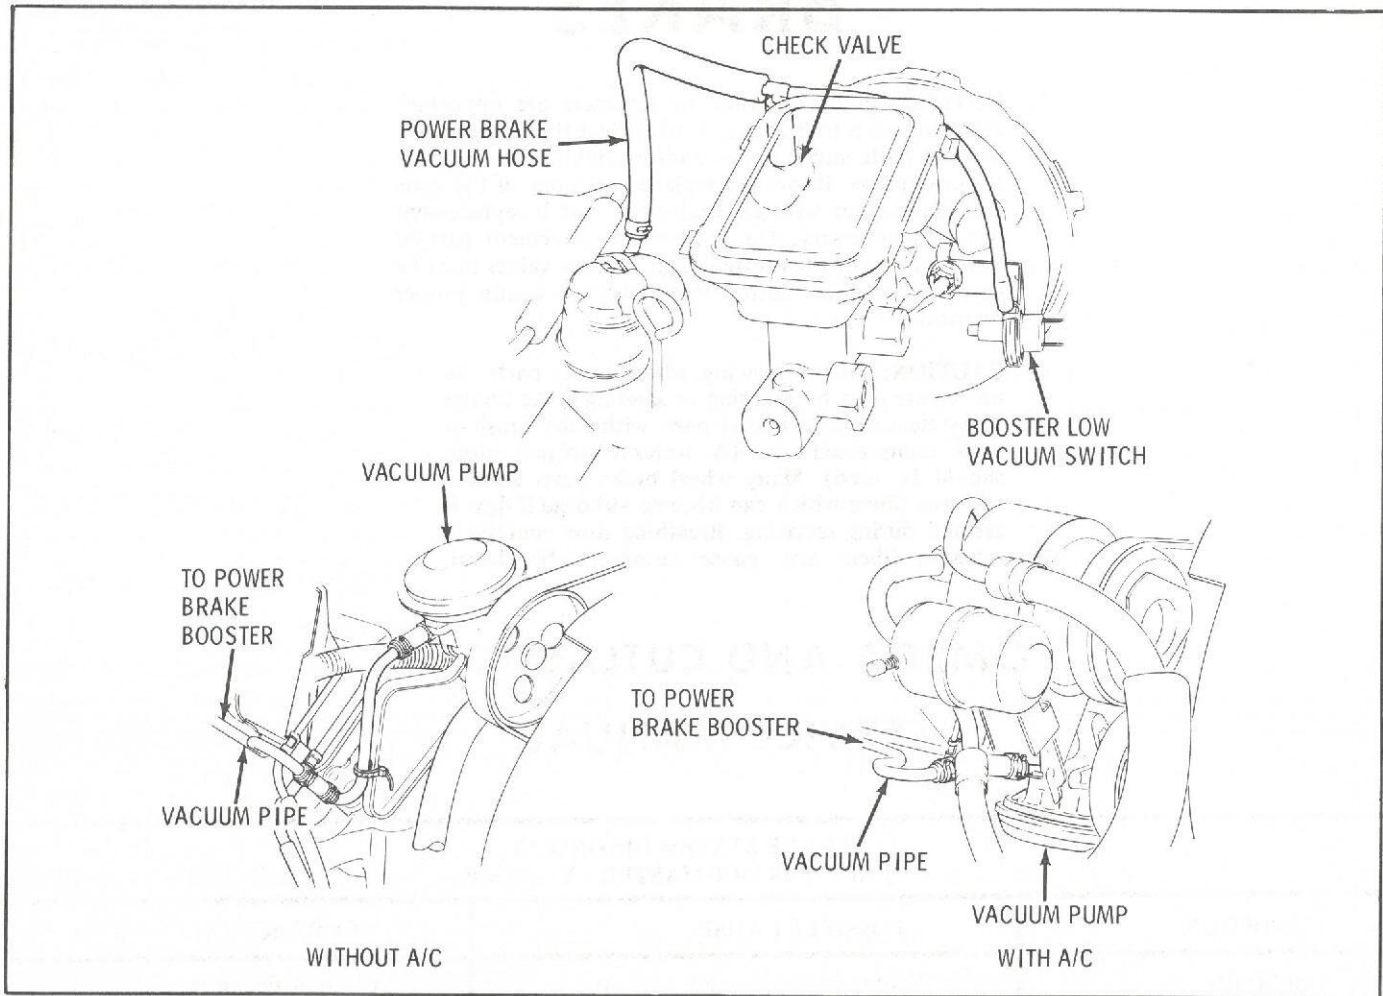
Power Brake Vacuum Pipe and Hose (Cutlass & V6 Diesel) - Replaces Figure 5-7
